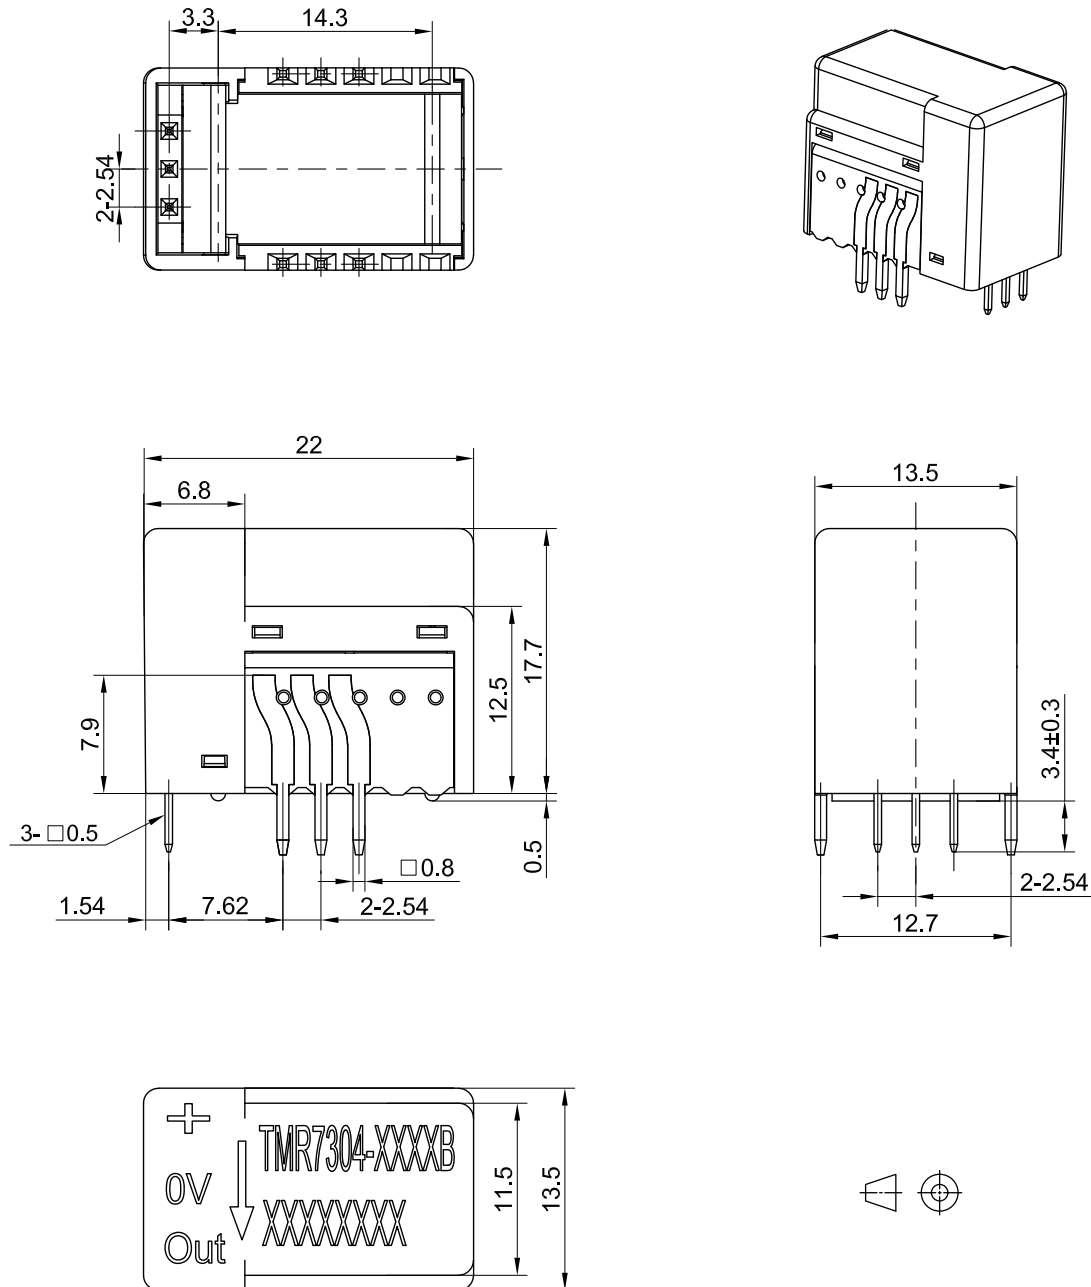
Dimension for TMR7304-B (unit: mm, tolerances for unmarked scales ±1 mm)
